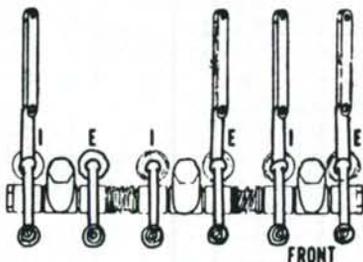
With No. 1 piston on TDC compression stroke on three-cylinder engines, adjust intake and exhaust valve clearance on No. 1 cylinder, exhaust valve on No. 2 cylinder and intake valve on No. 3 cylinder. Refer to Fig. 76.
